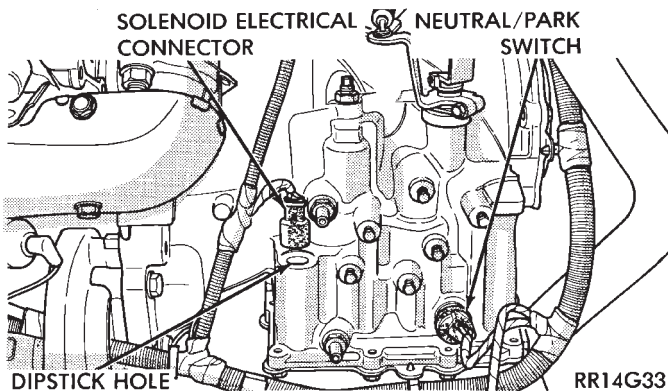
Torque Converter Clutch Solenoid Wiring Connector
